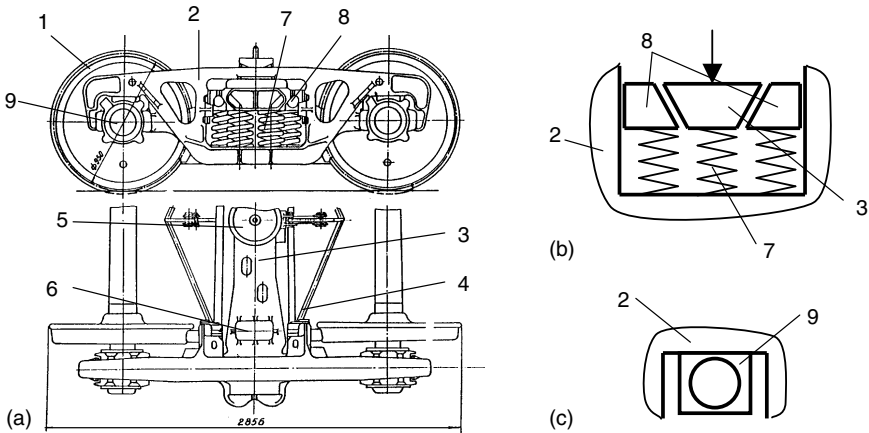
Type 18-100 bogie: (a) general view; (b) central suspension scheme; (c) primary “suspension” scheme (1, wheelset; 2, side frame; 3, bolster; 4, braking leverage; 5, centre bowl; 6, rigid side bearings; 7, suspension springs; 8, friction wedge; 9, axlebox).
